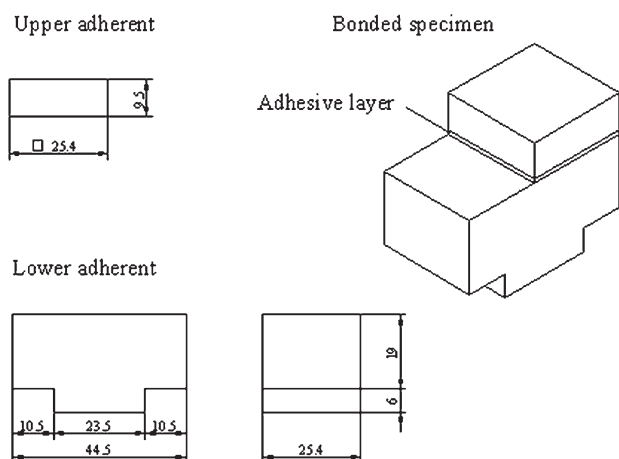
Dimensions of test specimens according to ASTM 950-3 standard.
